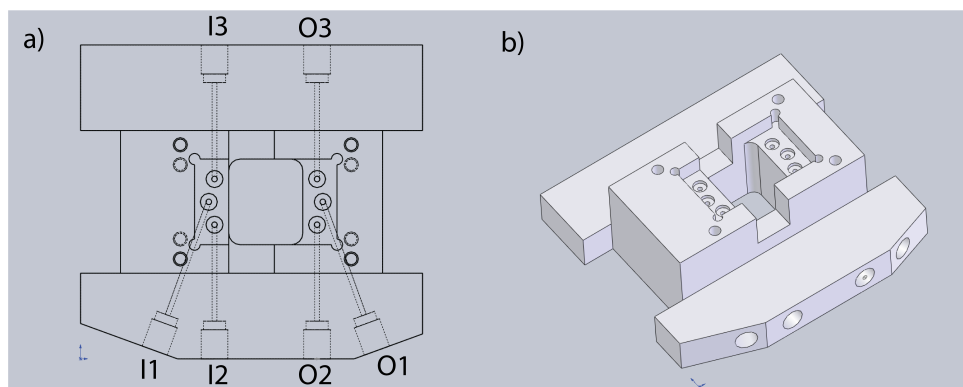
a) The view of the chip holder (from the top) showing inlets and outlets. b) Place of the PDMS chip in the PMMA holder.
